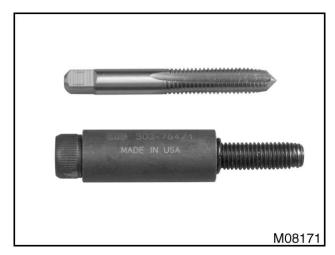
ZTSE4783 Glow Plug Installer Sleeve
